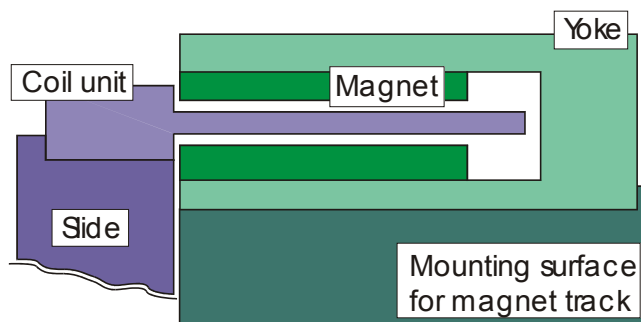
Coil unit, slide, magnet yoke and mounting surface, schematically
